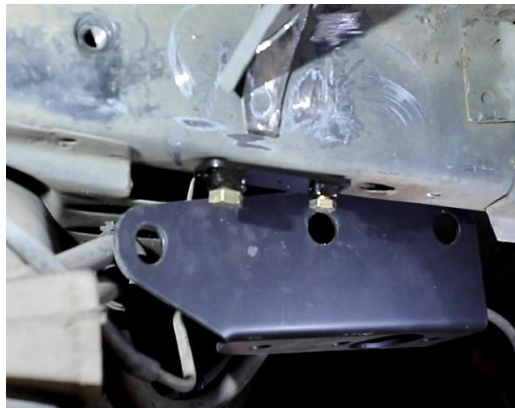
Locate Double Weld Nut Doubler Plate
